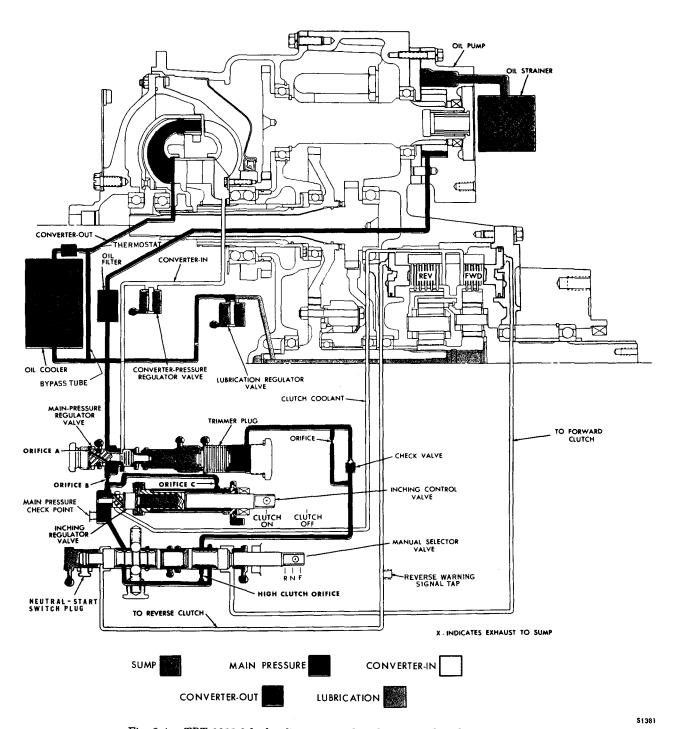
TRT 2211-3 hydraulic system with inching control—schematic view
